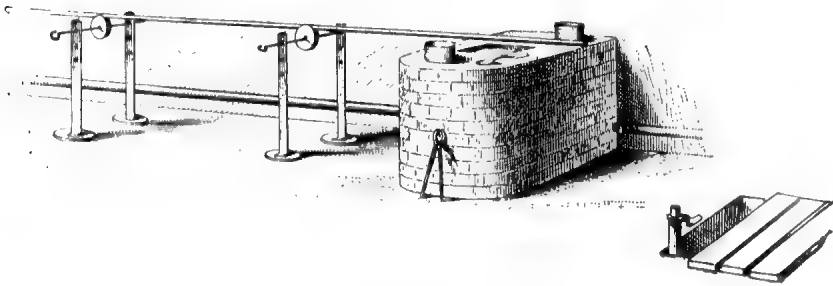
Portable Supports for Holding Pipes while Brazing.
